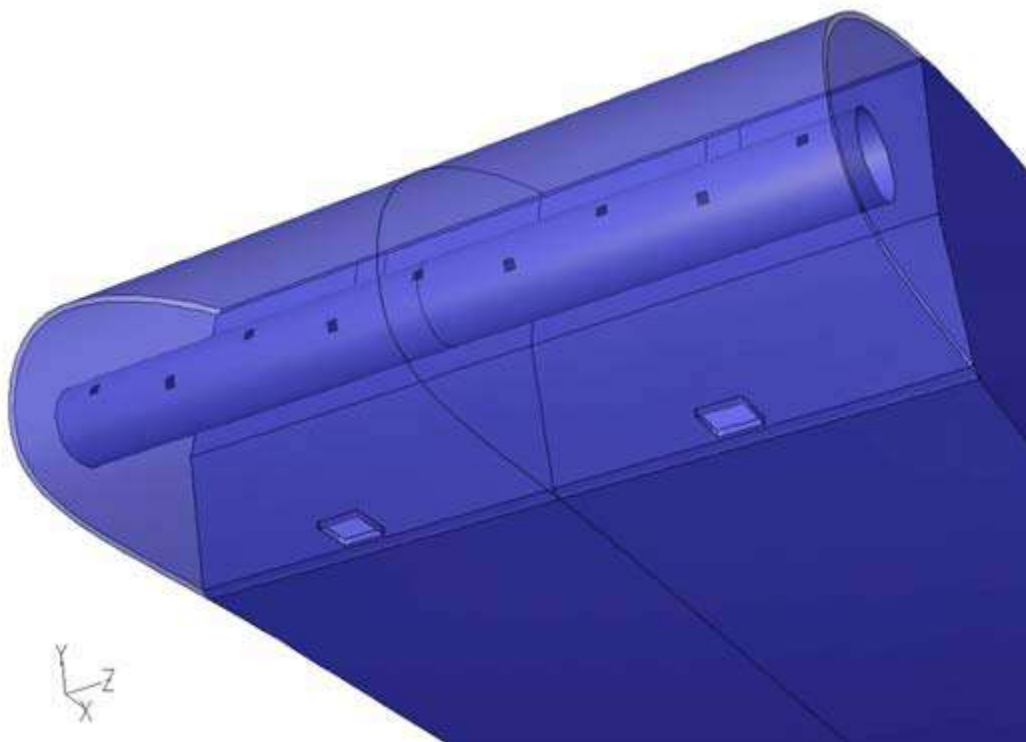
Three-dimensional bay model with two exhaust holes (the skin and heat shield shown by wires)
